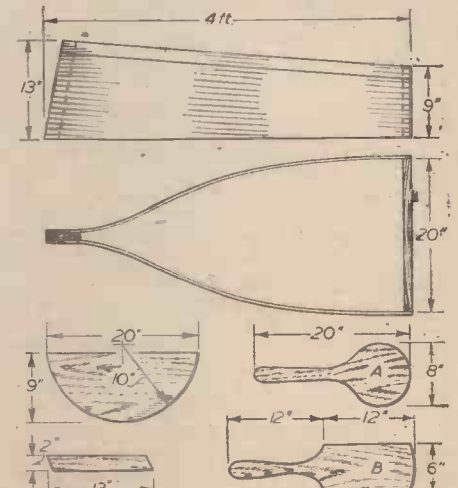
Side view and plan of boat, with details of bow post, rear end, and paddles.
